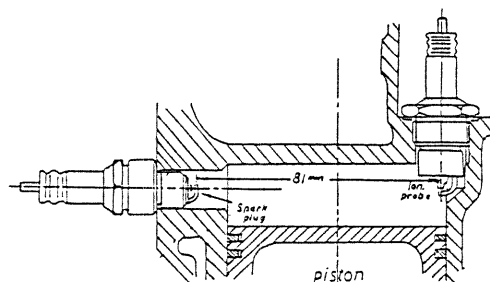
The combustion chamber of CFR engine with the layout of ionization probe.
